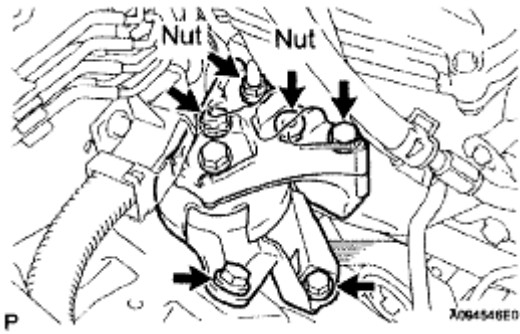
Locating Engine Mounting Insulator With Bolts And Nuts
